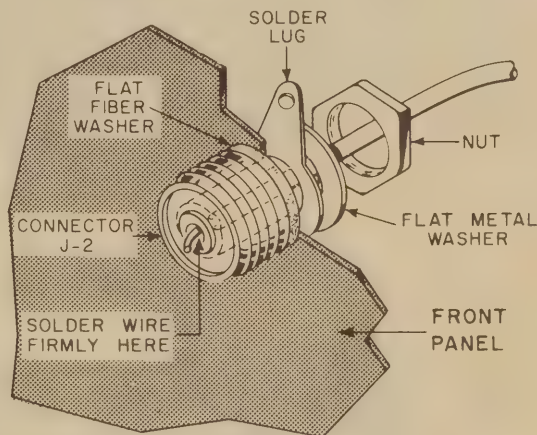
HOW TO MOUNT THE CHASSIS CONNECTOR
